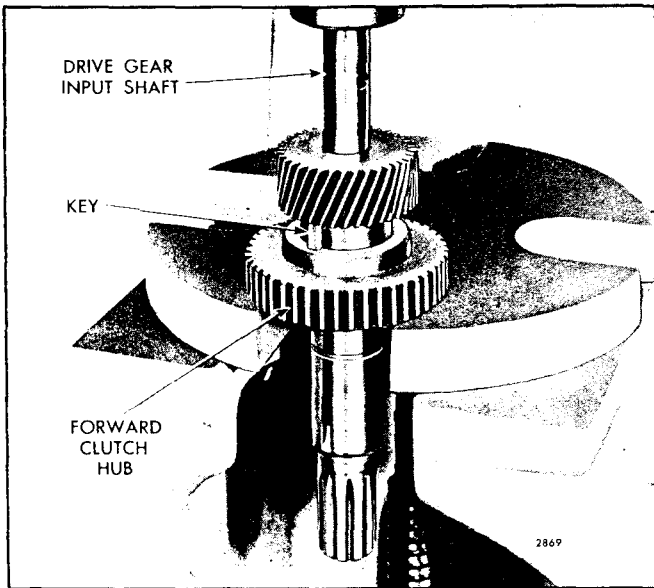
Installing Forward Clutch Hub on Drive Gear (Input) Shaft
